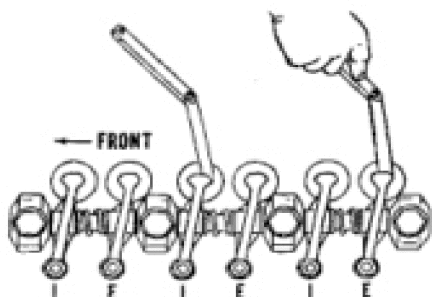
With TDC timing mark aligned and No. 1 piston on exhaust stroke, the two indicated valves may be adjusted. Refer also to Fig. 67.
